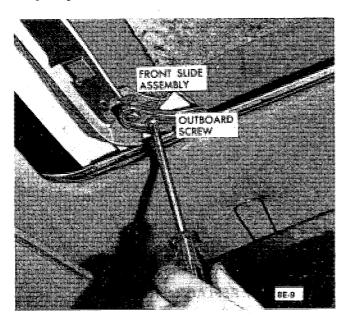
E-9 Remove Outboard Screw From Front Slide Assembly
